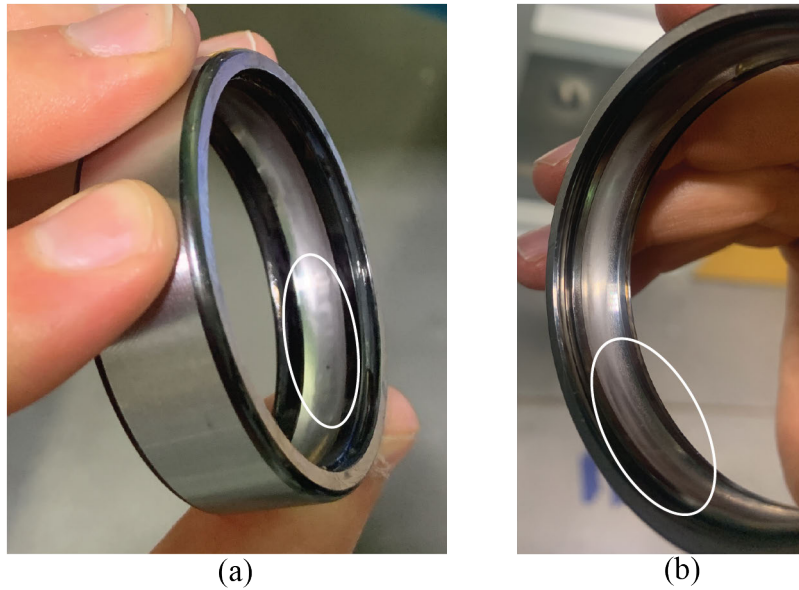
Contamination Code 24 smearing damage for 6205 bearing (a) and 6206 bearing (b)
